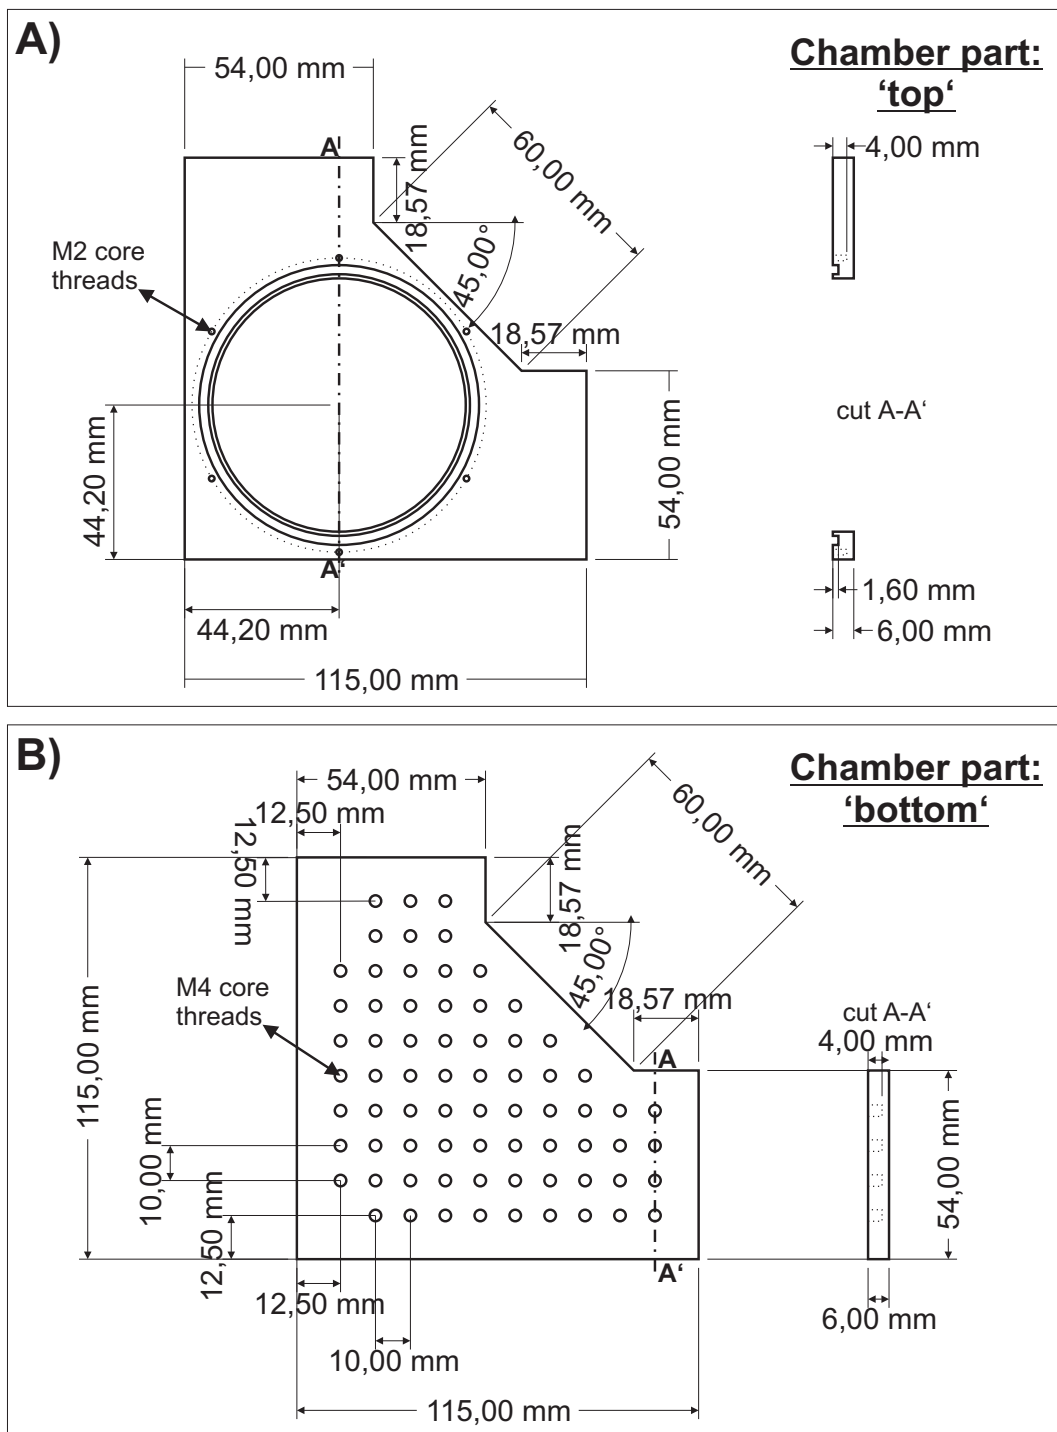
Technical drawings of the experimental chamber parts 'top' and 'bottom'.
